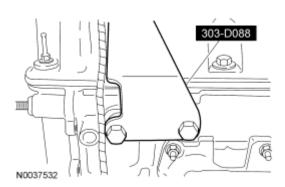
Installing Special Tool To RH Cylinder Head Courtesy of FORD MOTOR CO.
